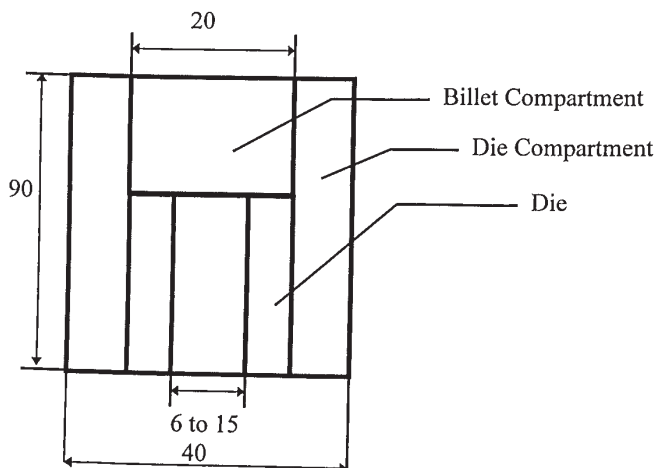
Scheme of the experimental device used for thixoextrusion tests.
